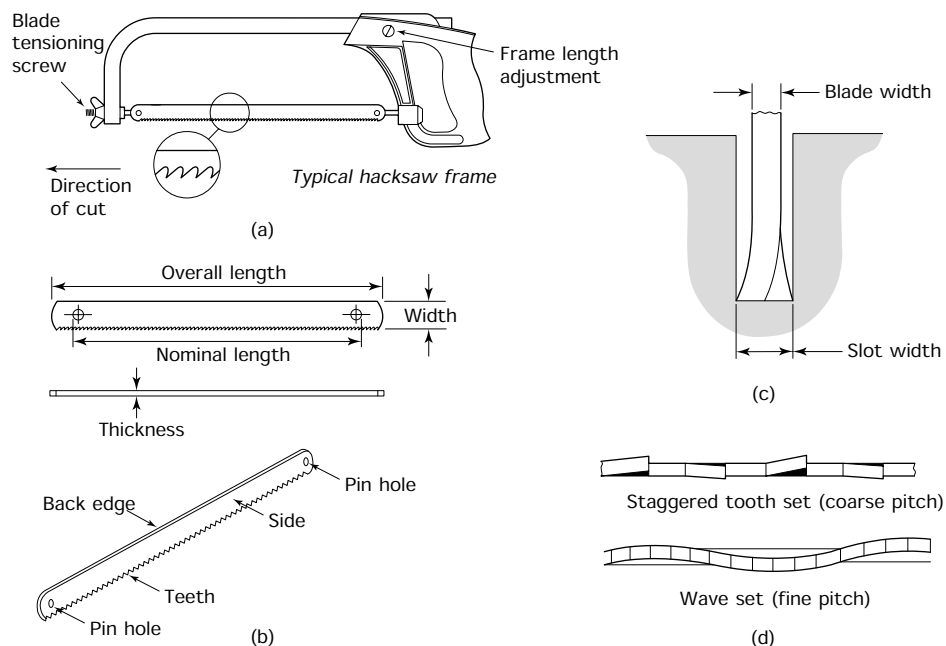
The hacksaw and its blades: (a) engineer's hacksaw showing typical hacksaw frame; (b) hacksaw blade; (c) the effect of set; (d) types of set
